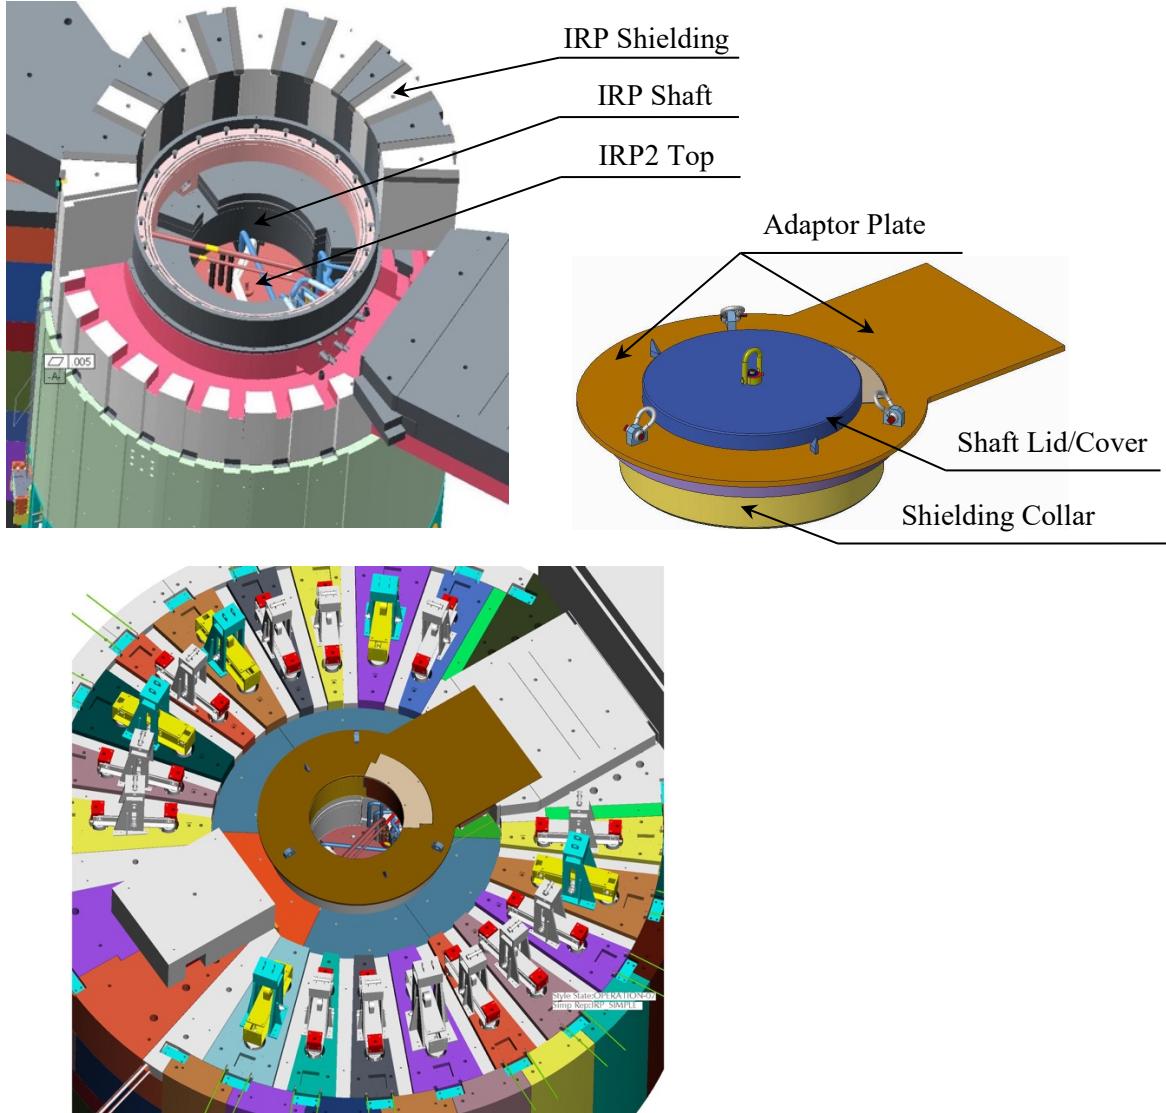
View of the target monolith with removed top shielding with open IRP shaft (top row left) from the top, shielded adapter plate with cover (top row right), target monolith with installed shielded adapter plate.
